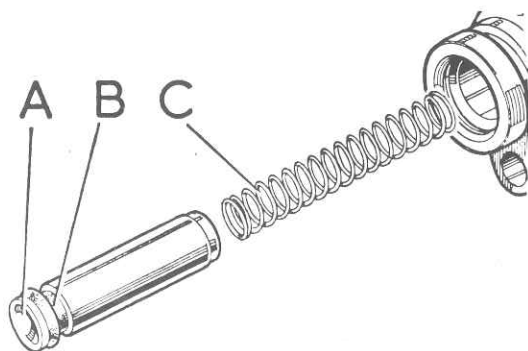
Removing the piston and spring from master cylinder (CB type)
